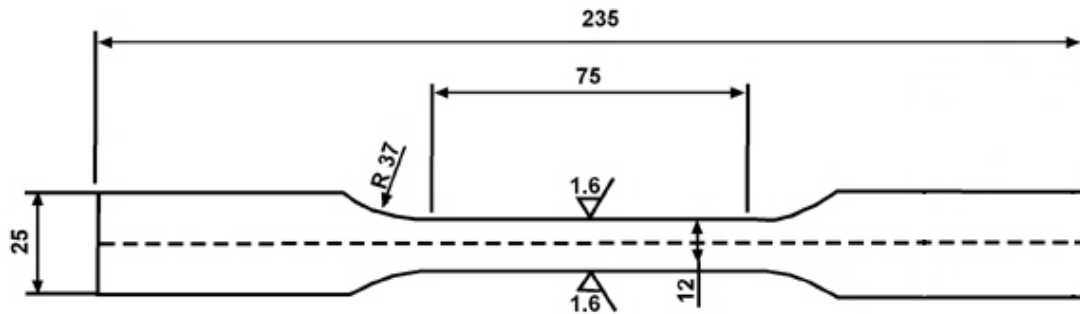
Test piece used for tensile testing. Dimensions are given in mm.
